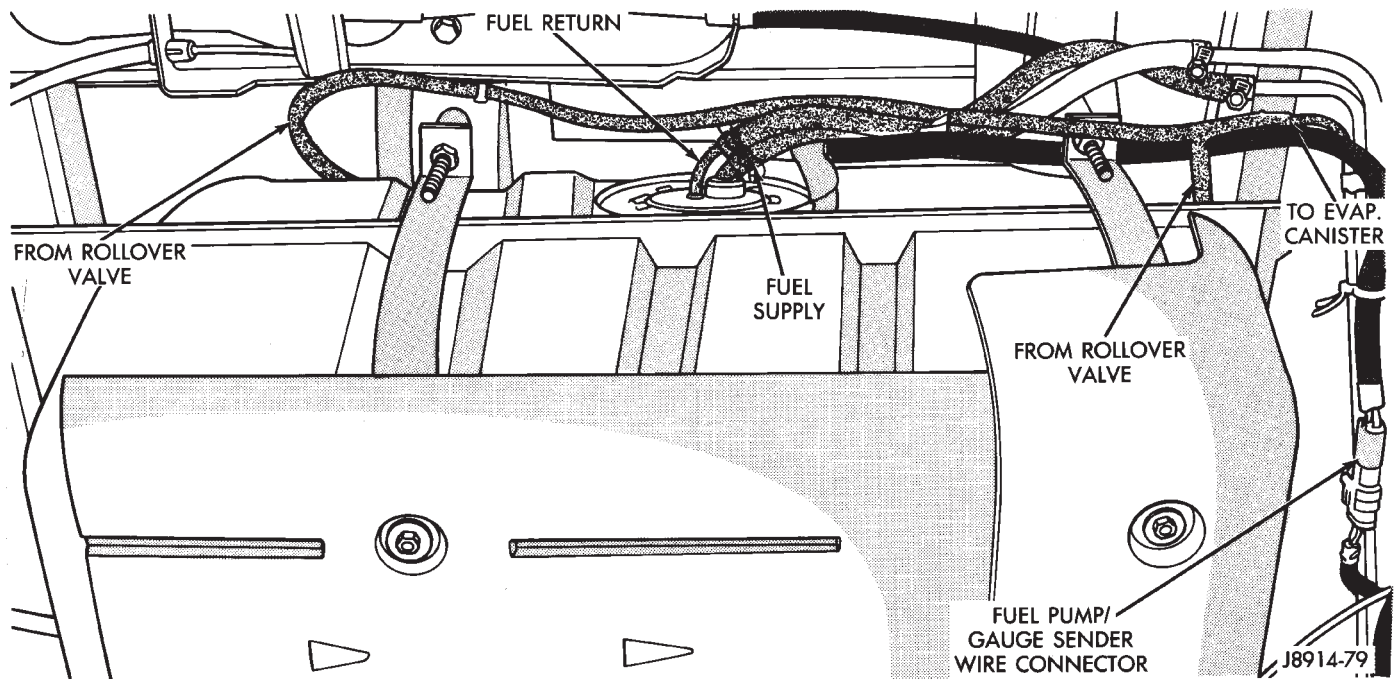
Fuel Pump Module Connector and Fuel Hoses—Typical
